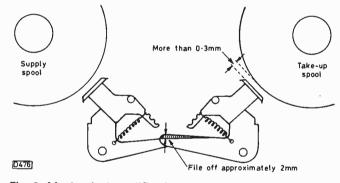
Mechanical modification to cure tape damage due to looping when the machine stops after rewind.
